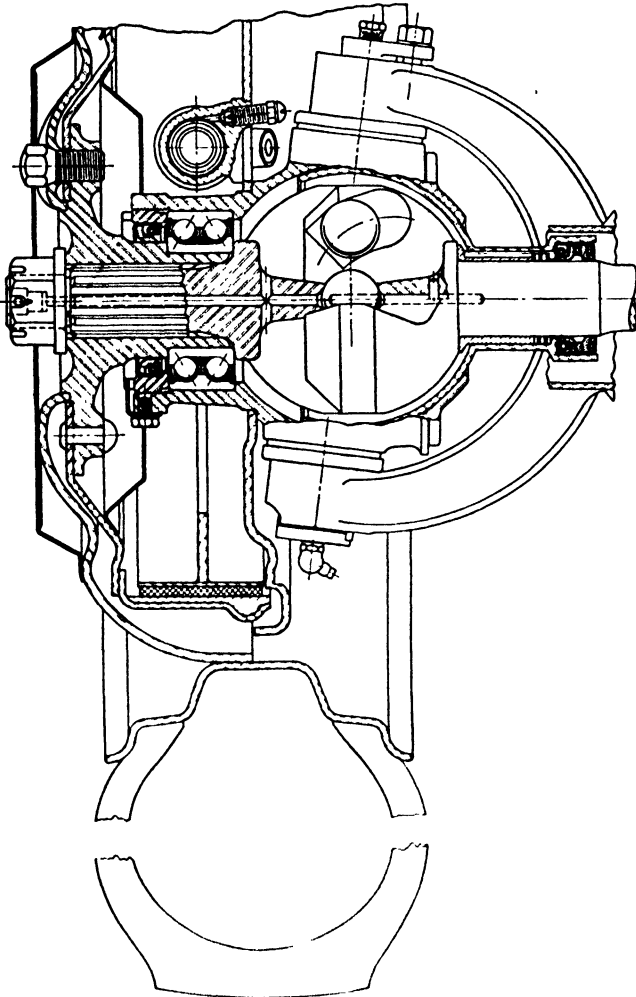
Treatment of shafts, fasteners, ball bearings, and so forth.
